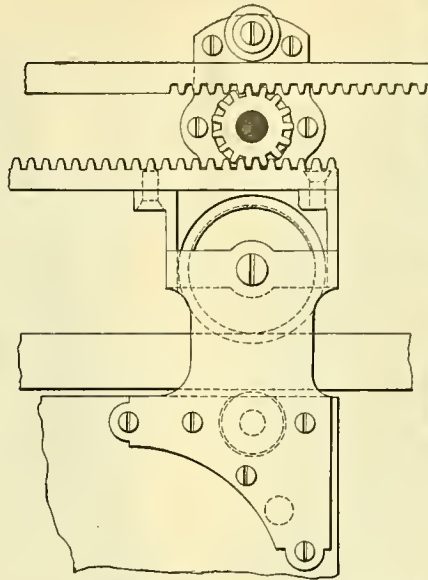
Side Elevation. Fig. 2845. Cross Section
